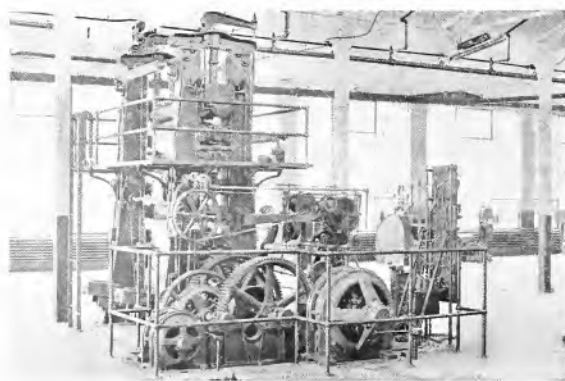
Phase-wound Main Motor and Squirrel-cage Threading Motor, Driving 50-in., 9-roll Stack Paper Calender, Strathmore Paper Co., Woronoco, Mass.
